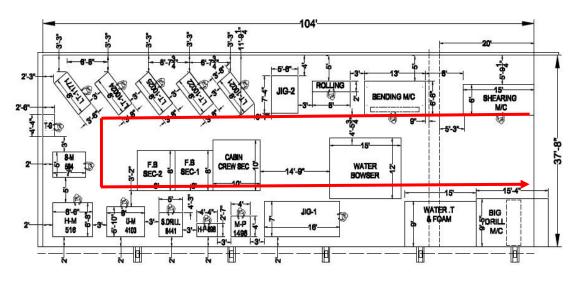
Designed Layout Fabrication Section of Manufacturing Shop 1
